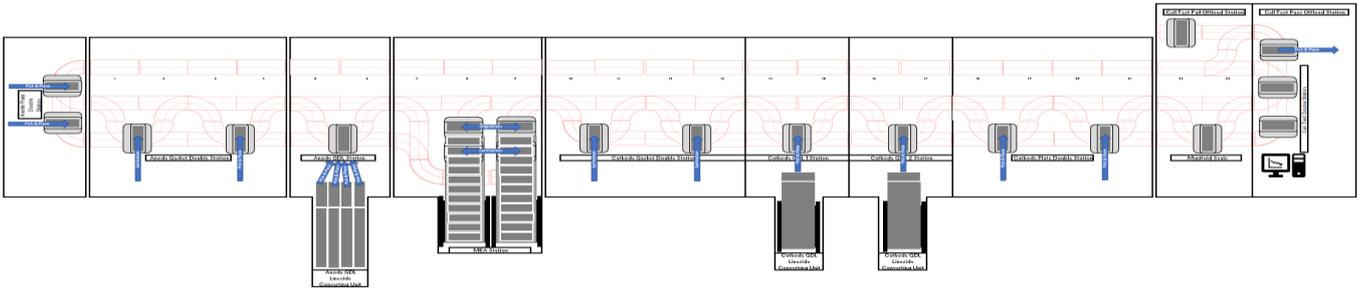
Envisaged Modular Layout for Blueprint Design Based Cell Assembly Line
